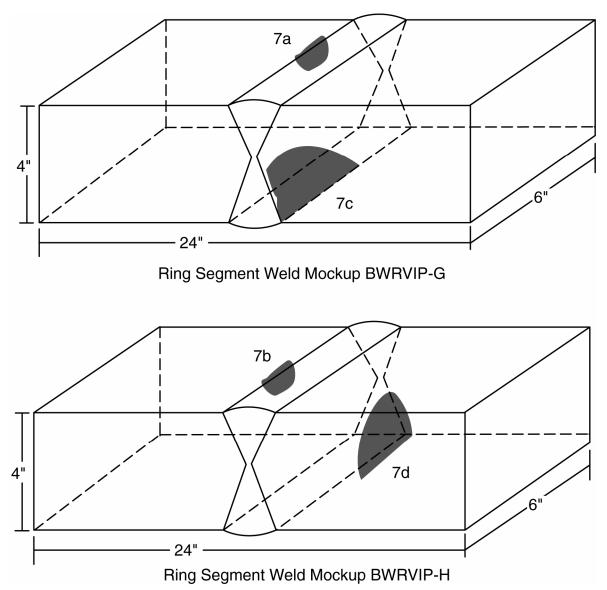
Mockup BWRVIP-G and BWRVIP-H, Representing the Ring Segment Weld
